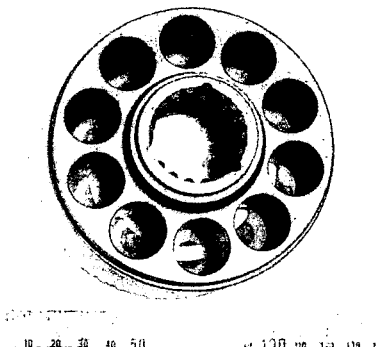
Hydraulic cylinder block manufactured by machining of a cast workpiece
